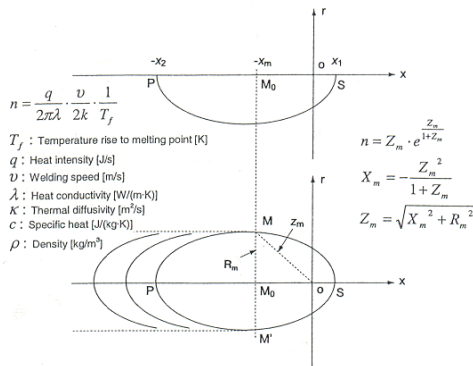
Theoretical weld pool outer line by a moving point heat source
